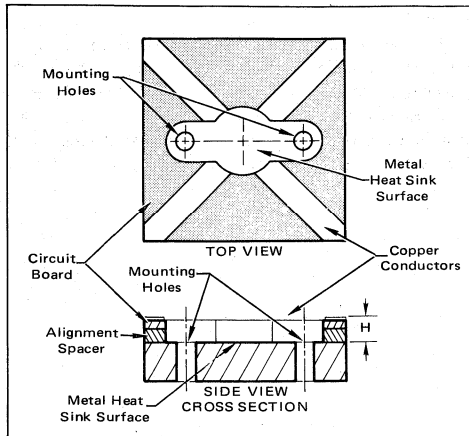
Flange Type SOE Transistor Mounting Method
